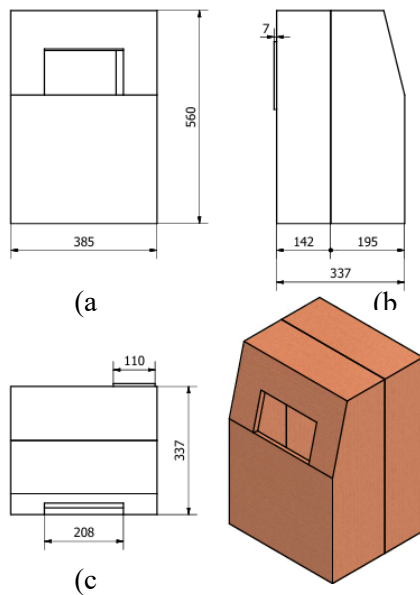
Main views of the assembled housing. (a) Front View, (b) Side View, (c) Top View
